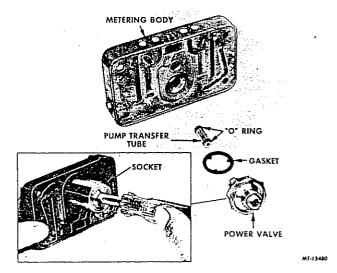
PRIMARY METERING BODY WITH ACCELERATION PUMP TRANSFER TUBE (DISASSEMBLED VIEW)
